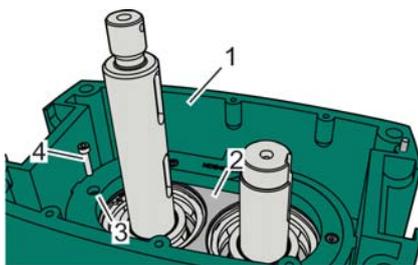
Attaching the upper bearing housing of the gearbox housing, example
